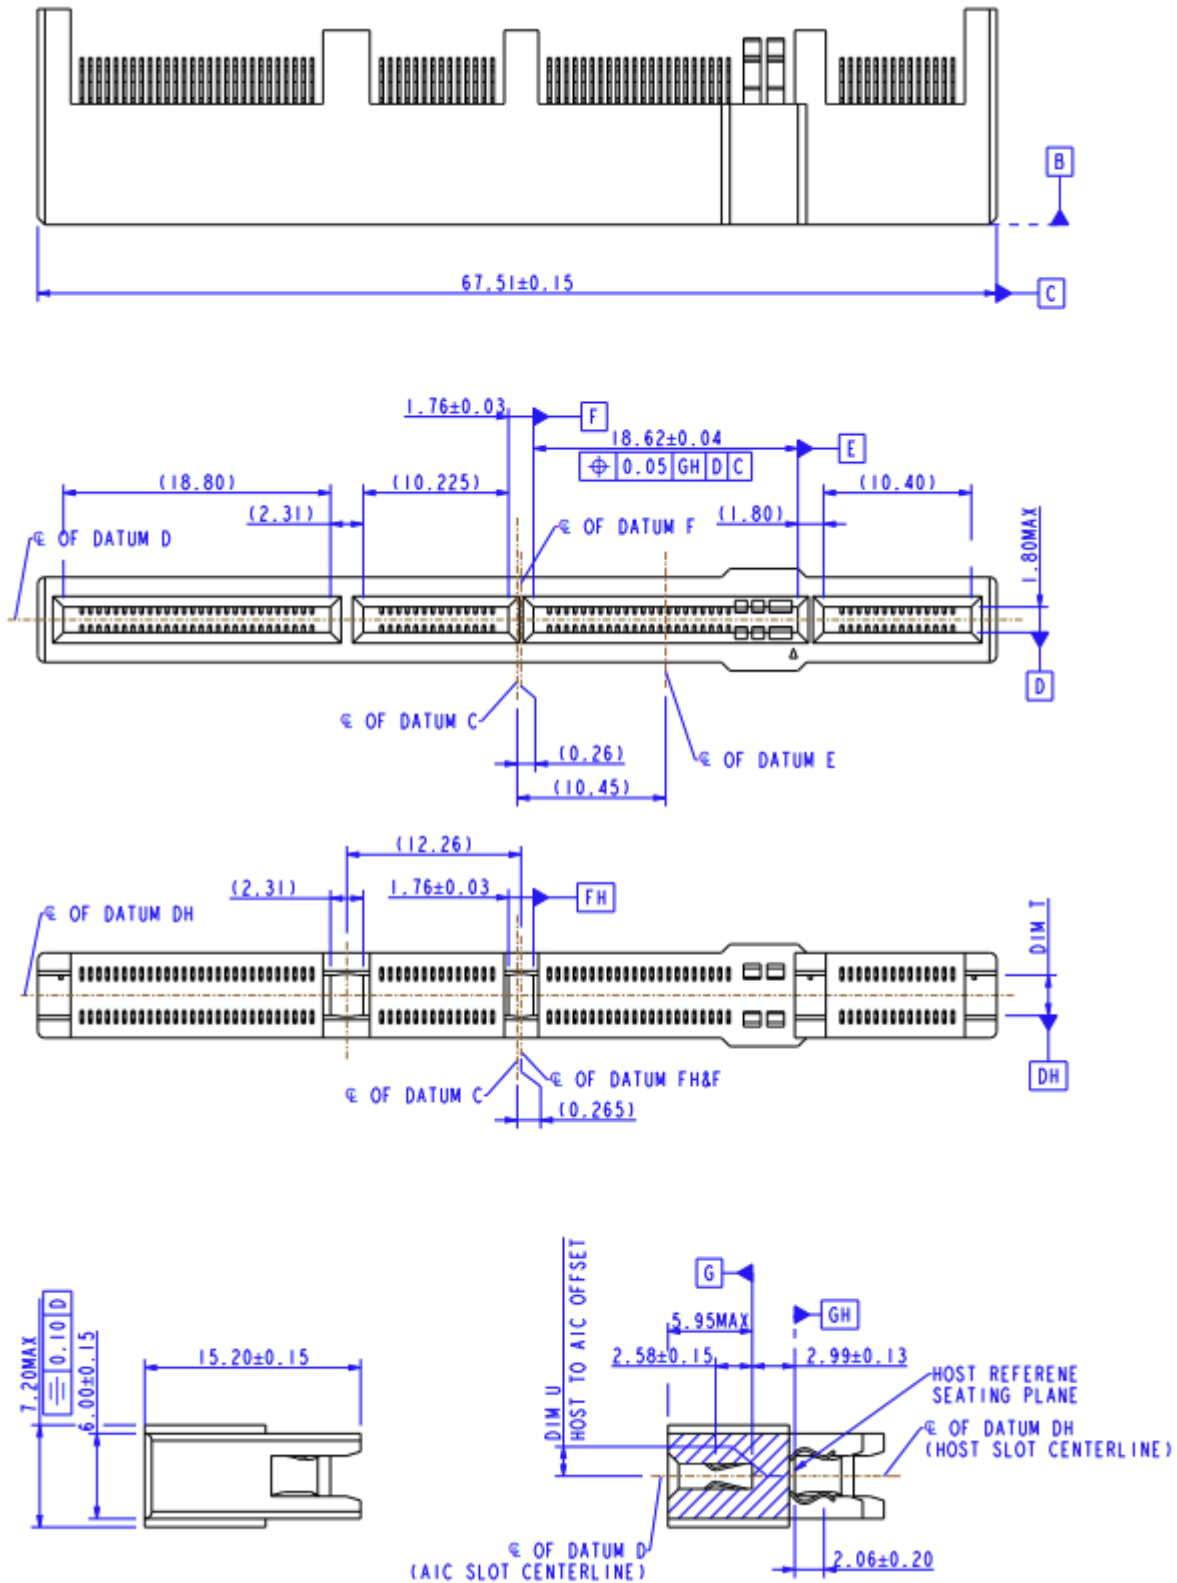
Straddle Mount PMM 4C+ EP Connector Dimensions
